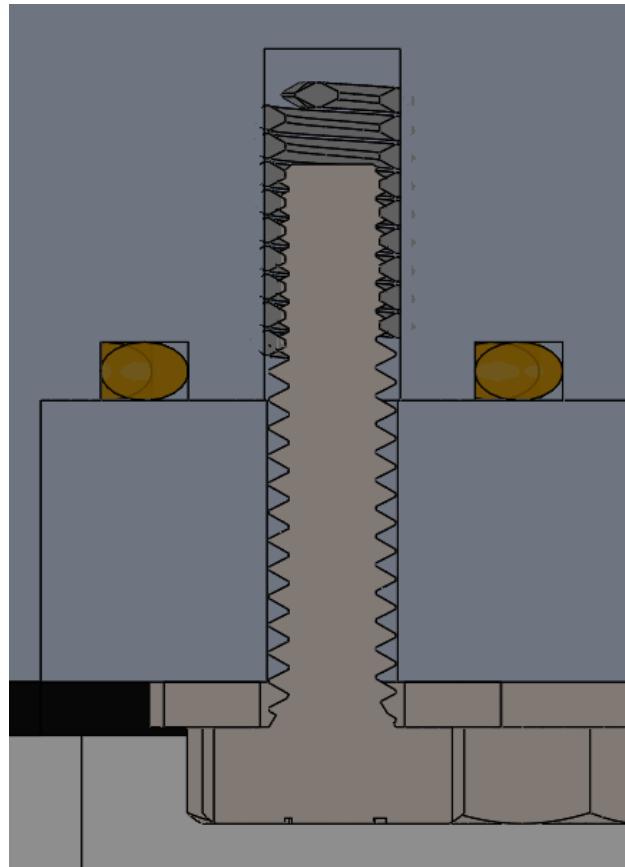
Injector Plate Bolts and Helical Inserts Cross Section
